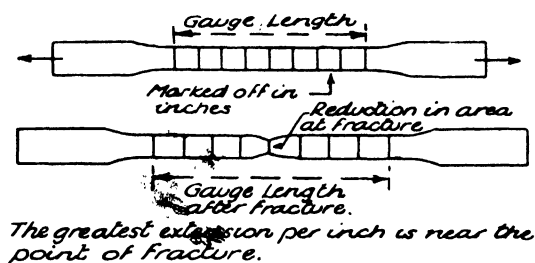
LABORATORY TENSILE TEST SPECIMEN.
